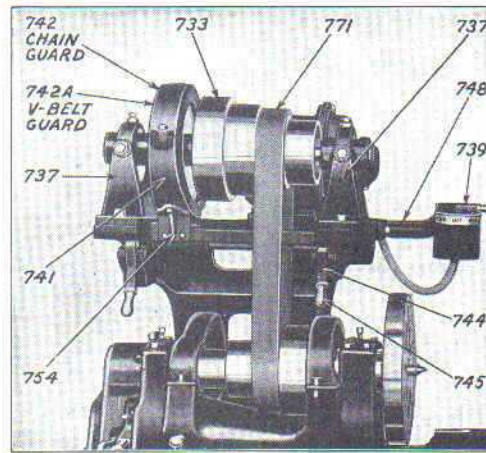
Front View of Silent Chain Motor Drive Unit Showing Location of Parts and Numbers.
